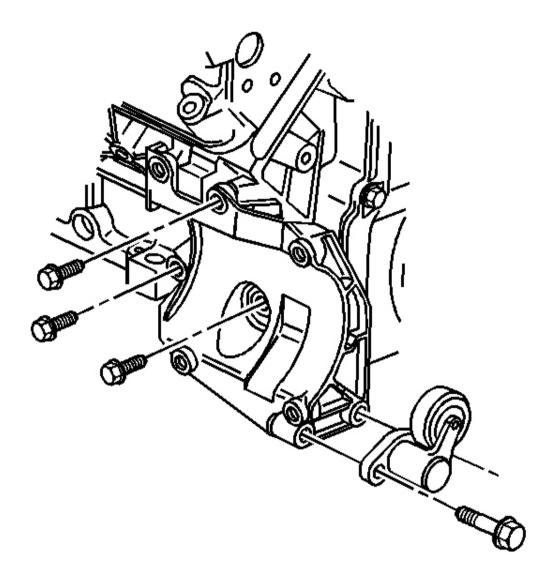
A/C Compressor Bracket Courtesy of GENERAL MOTORS CORP.
